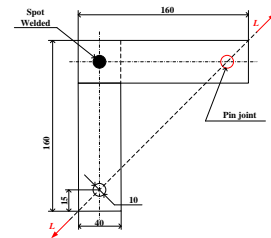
Spot-welded joints under torsional shear for fatigue testing
